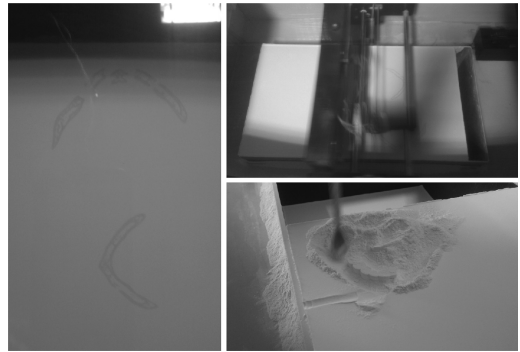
Model manufacturing process: sections printing, printing head working and model removal.
